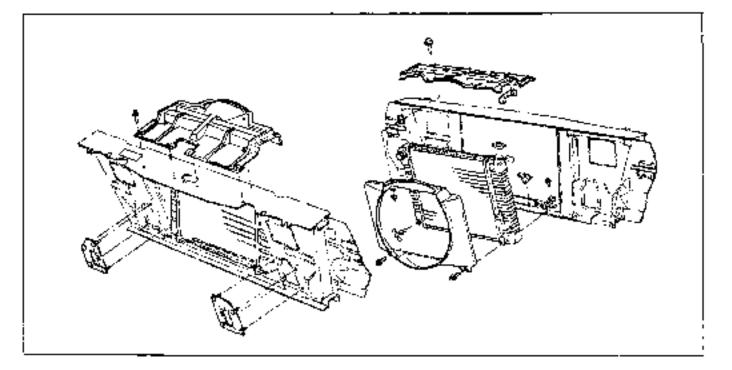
A-1 Redictor Support and Balfle Assembly - Rentiae
